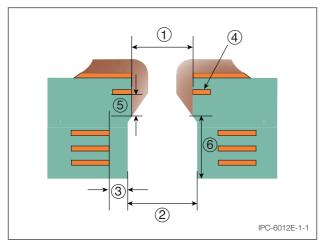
Example of a Back-Drilled Hole (Not To Scale)
